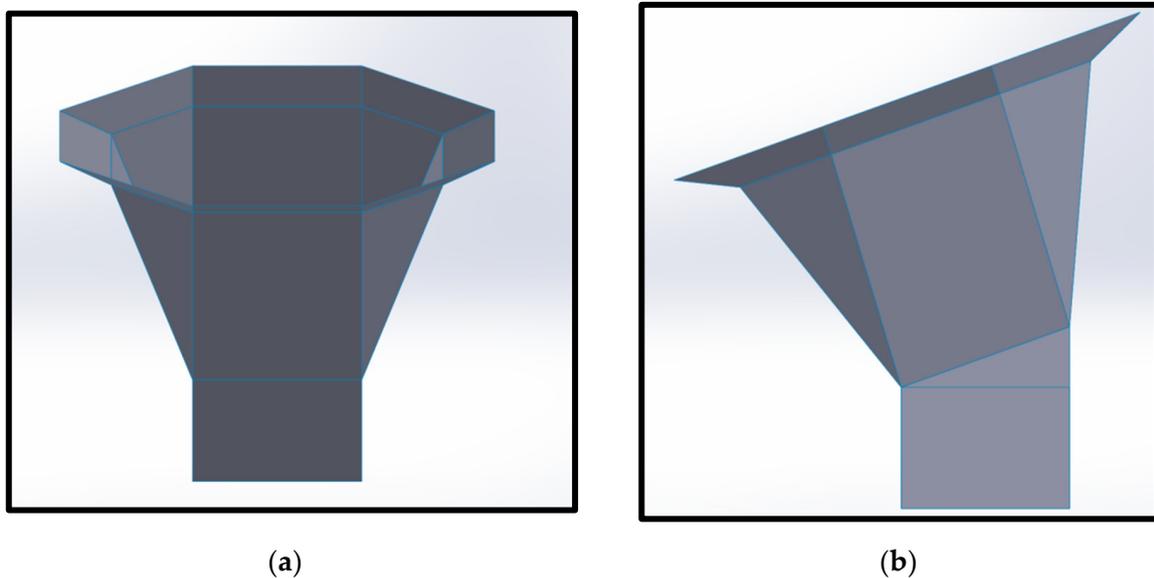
(a) Front view of the funnel-type solar cooker. (b) Side view of the funnel-type solar cooker.
